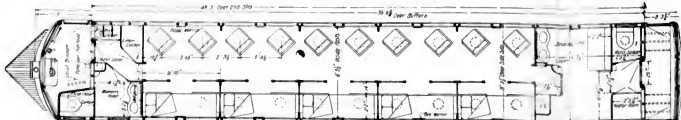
FLOOR PLAN, CONVERTIBLE SLEEPING AND PARLOR CAR.
